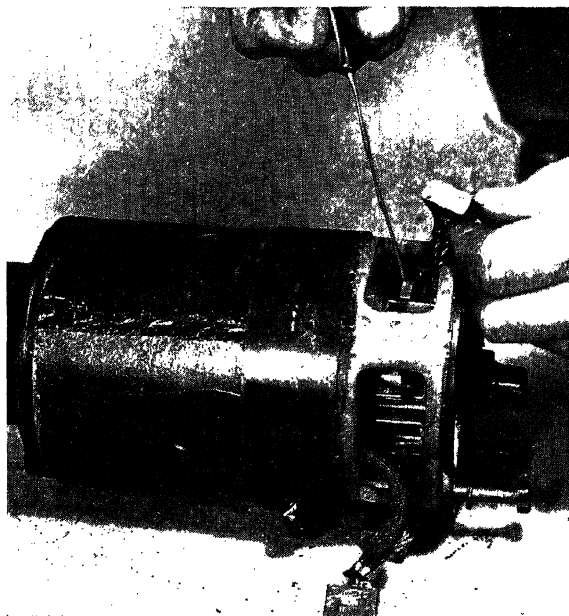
EXAMINATION OF BRUSH GEAR
